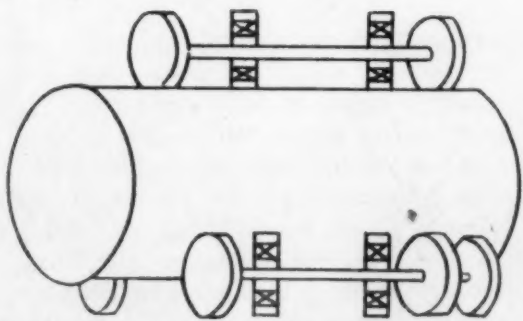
CENTRIFUGAL CASTING UNIT OF THE CRADLE TYPE.
